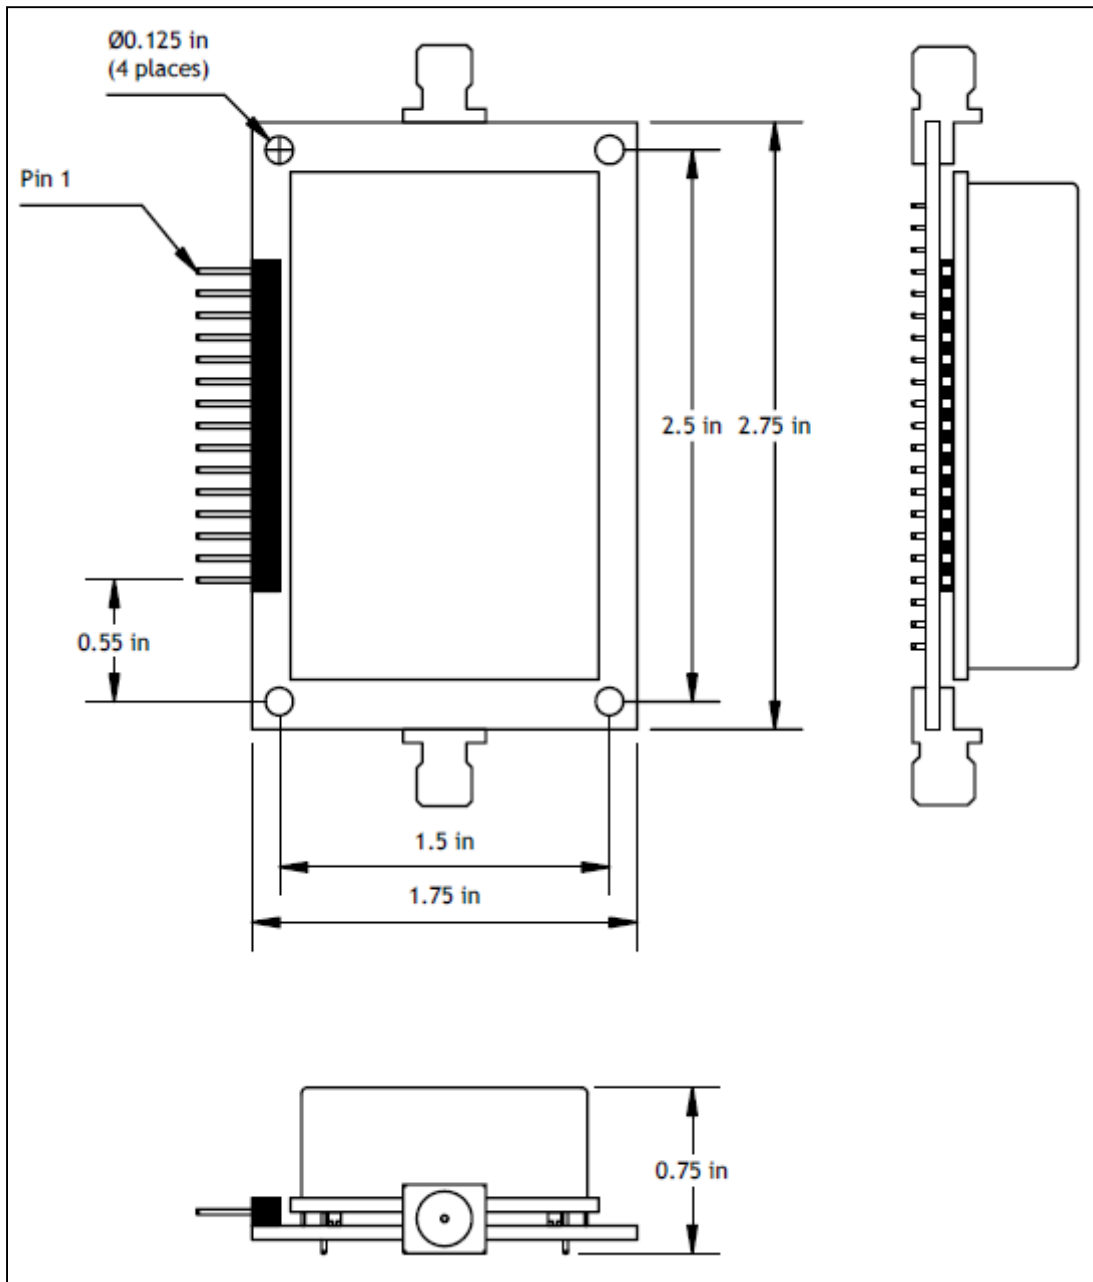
Connectorized SMA Package Dimensions, Top and Side Views
